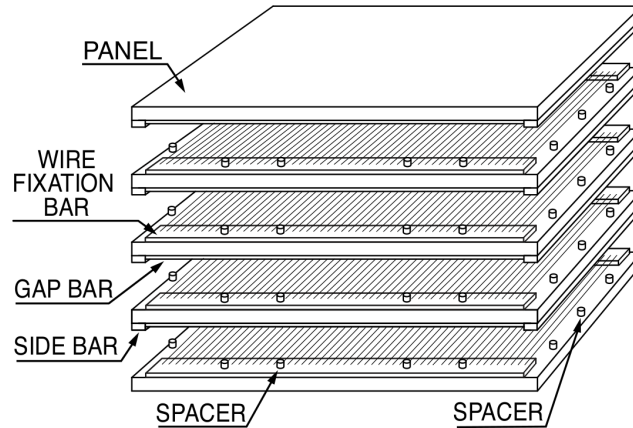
Exploded layout of a Multi Wire Proportional Chamber.
